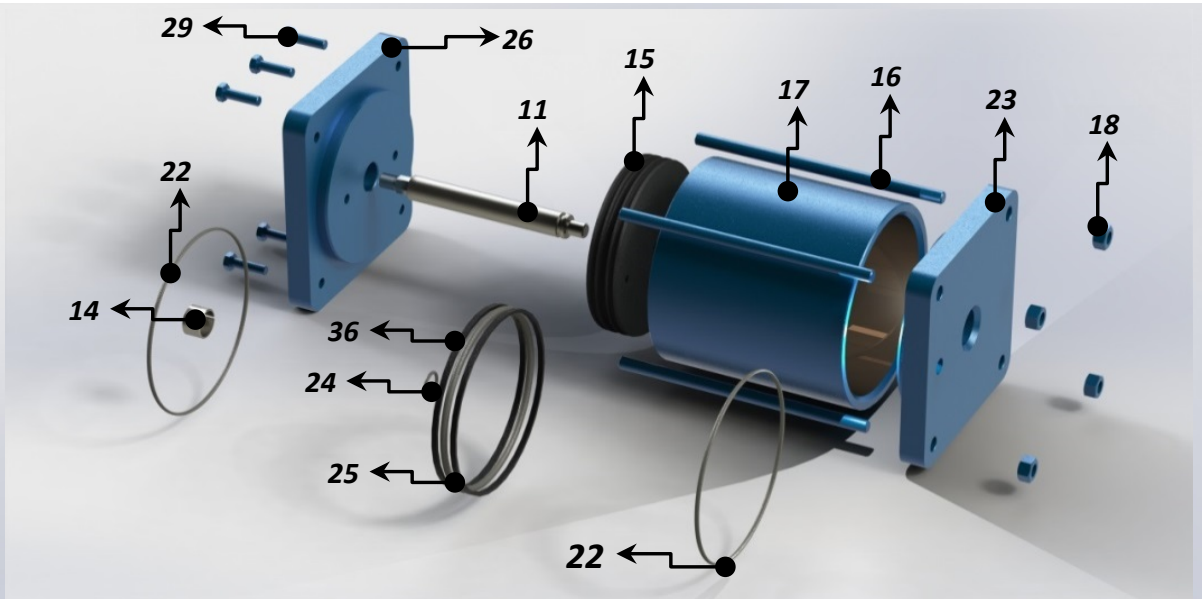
LPC Actuator Spring Return and Double Acting – Exploded Views
